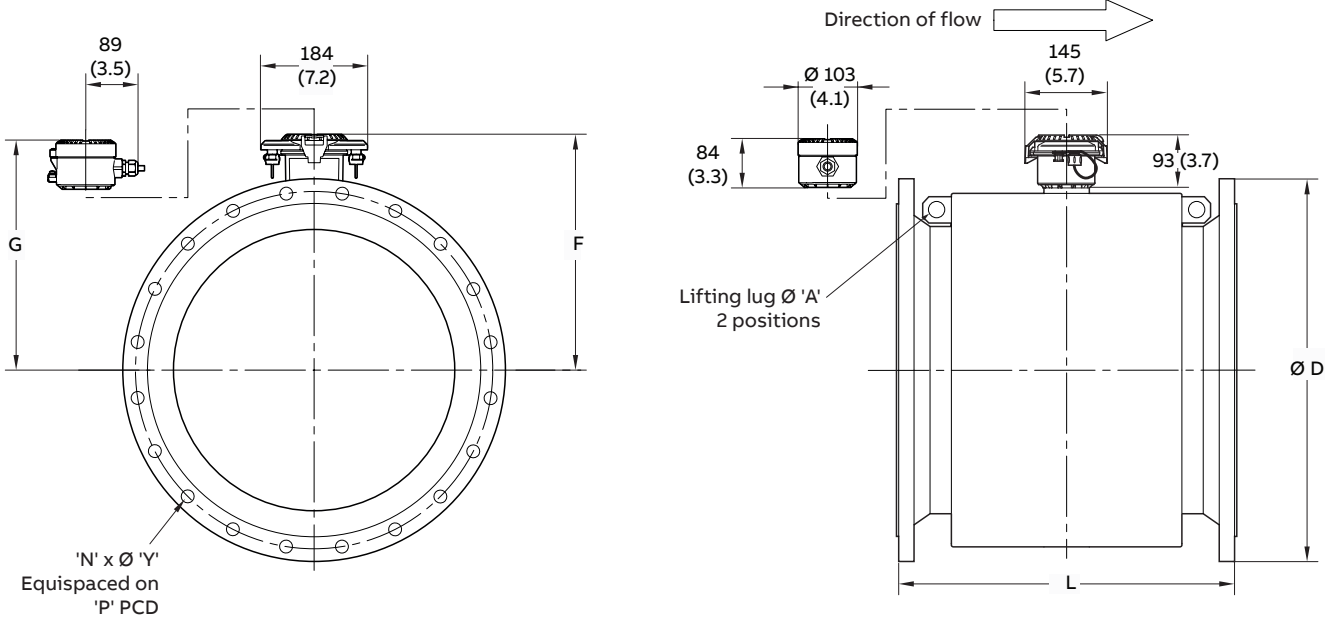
F-style sensor – DN450 to 600 (18 to 24 in.)
